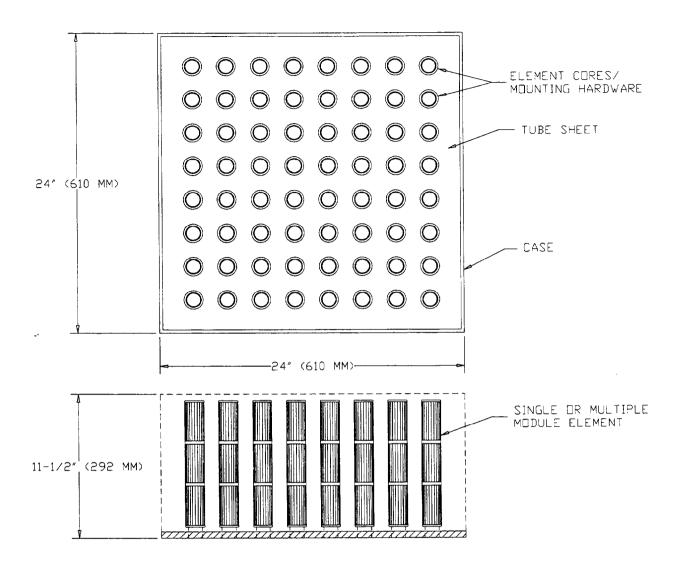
EXAMPLE OF PANEL CONSTRUCTED OF HEMA ELEMENTS.
